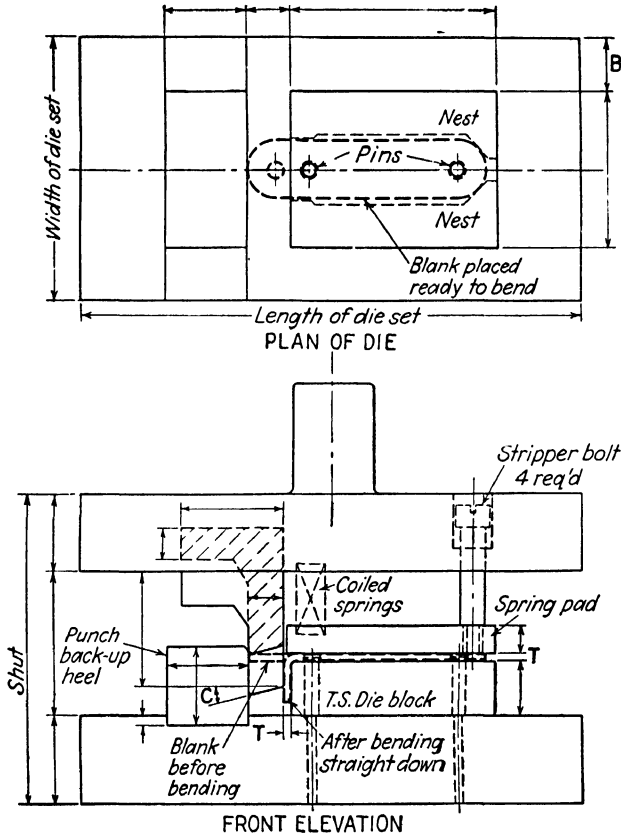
Side bend made in a common type of spring-pad bending die. Increasing angle  $C$ , on the face of bending punch, decreases the pressure required to make a bend.
